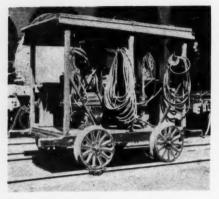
Welding Equipment Mounted on a Push Car for Round House Use
